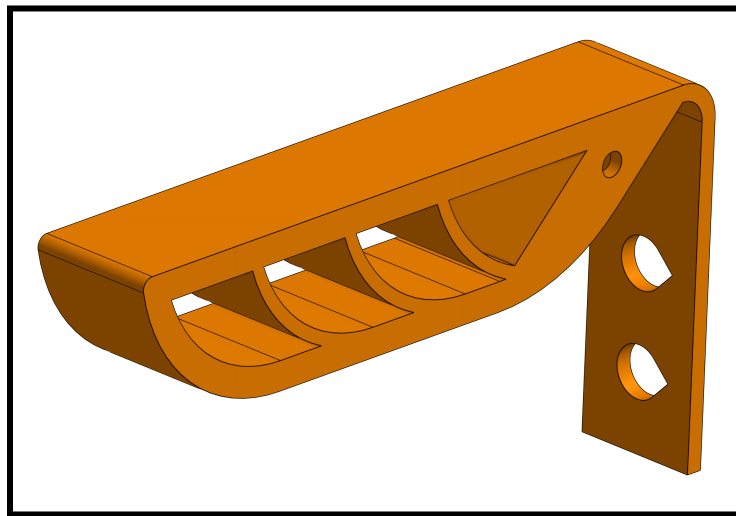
Isometric view of TPU digit design. Tear drop-shaped clearance holes can be seen, these holes allow for printing of the digit on its side while maintaining wall structure and print quality.
